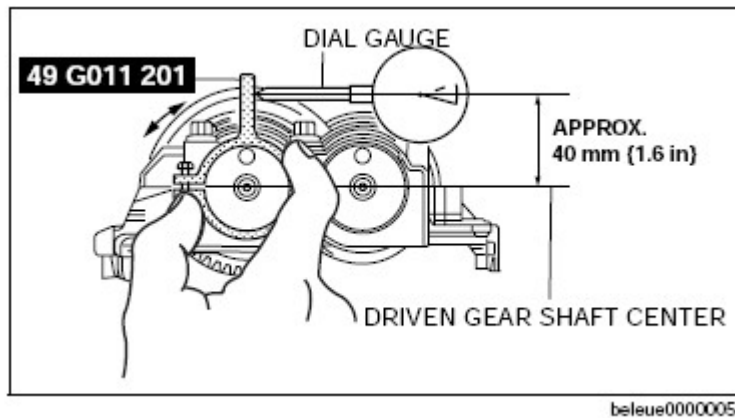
Setting SST (49 G011 201) And Dial Gauge
